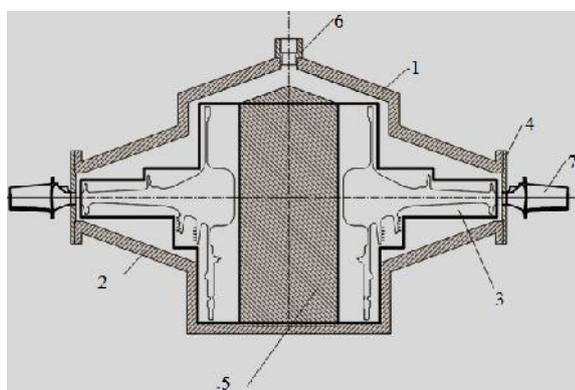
Construction of the shaping element for mono-wheel manufacturing
